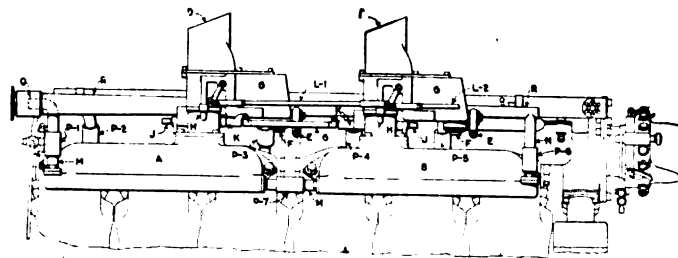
Longitudinal elevation showing experimental carbureter and intake header arrangement
